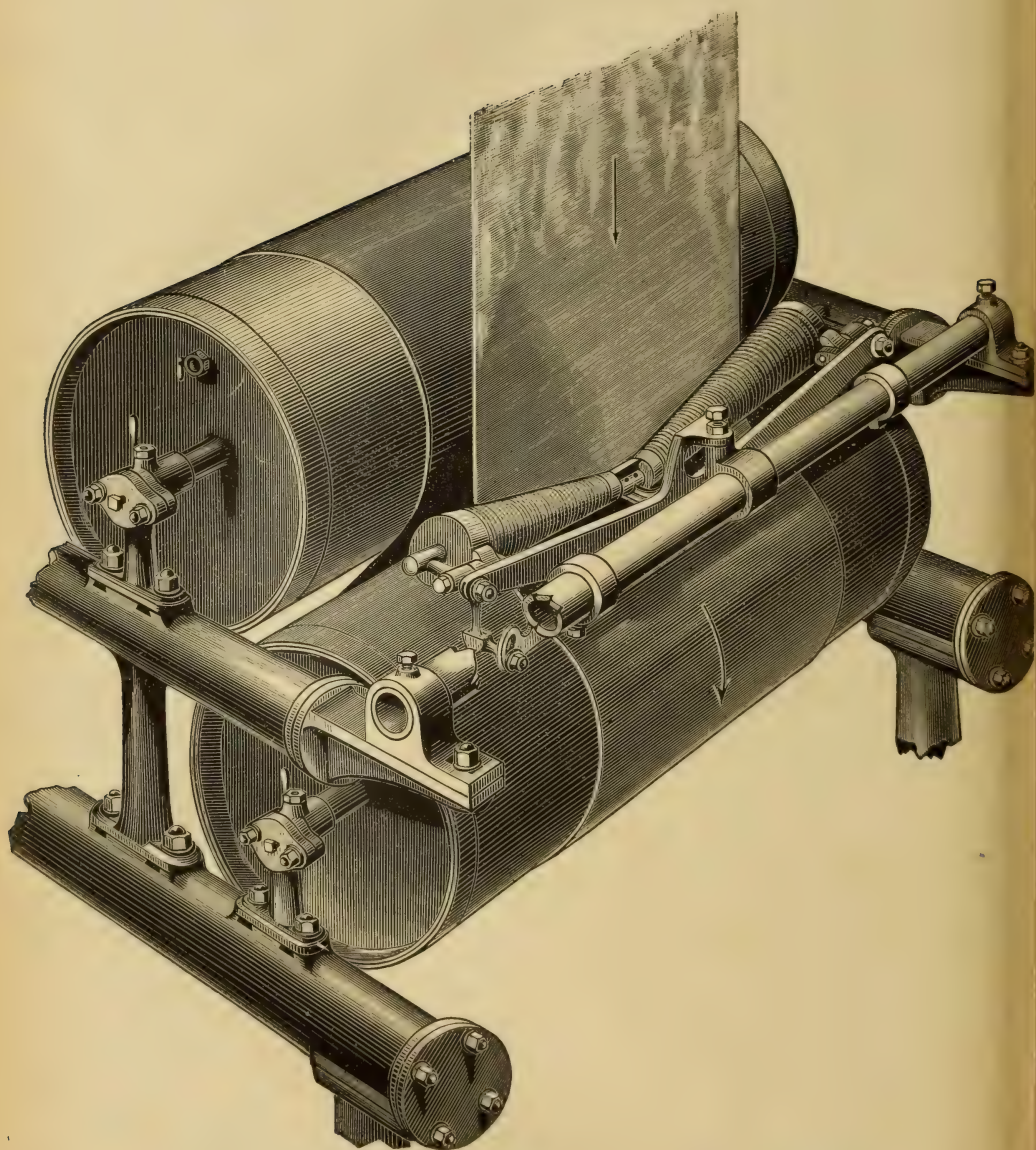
Conical expanding rollers as applied to a cylinder drying machine.
